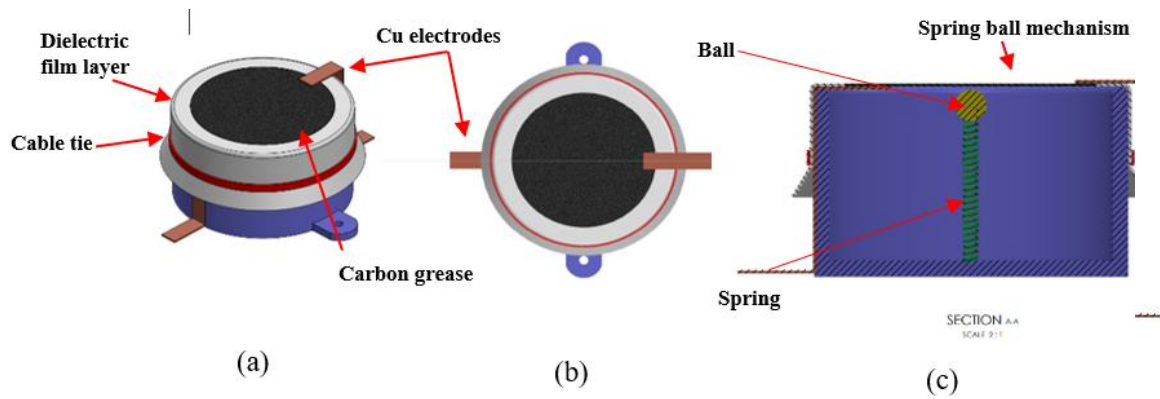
The schematic of the spring-loaded actuator (a) front view (b) top view (c) cross-sectional view
